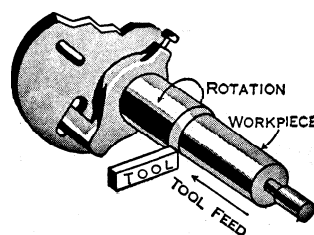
BASIC MACHINE-TOOL OPERATIONS: TURNING
